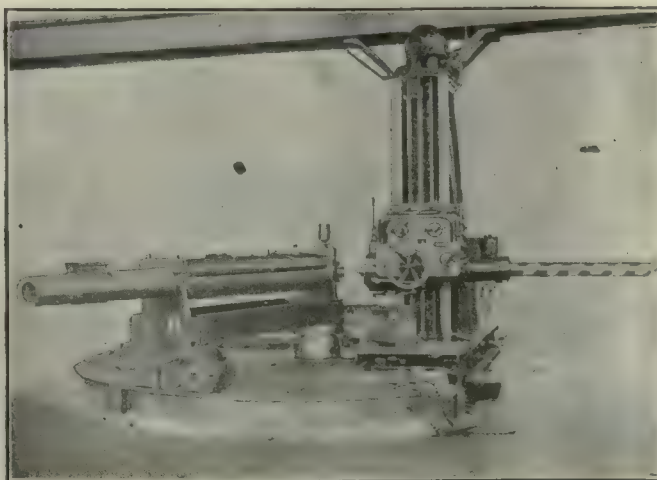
SPECIAL PIVOTED GUN FIXTURE ON MILLING MACHINE
